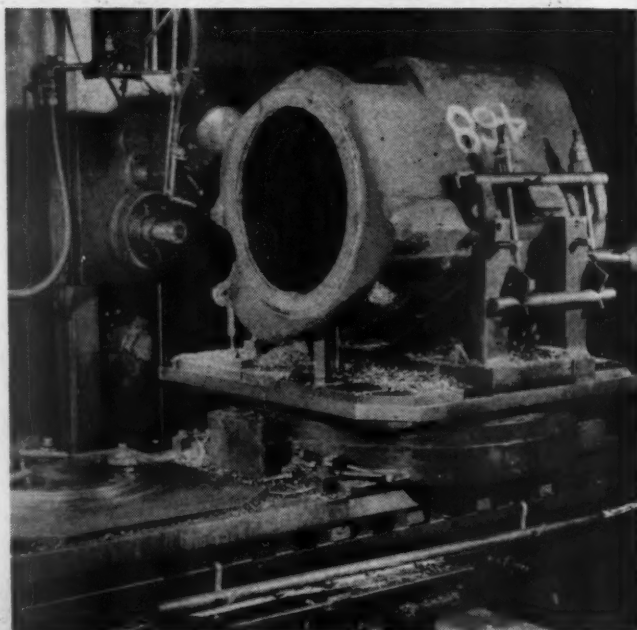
Special work-holding fixture mounted on a standard rotary table—Amplly constructed, this fixture rigidly supports the motor housing—The motor housing is placed on a rotating plate to simplify machining supports and nose piece
